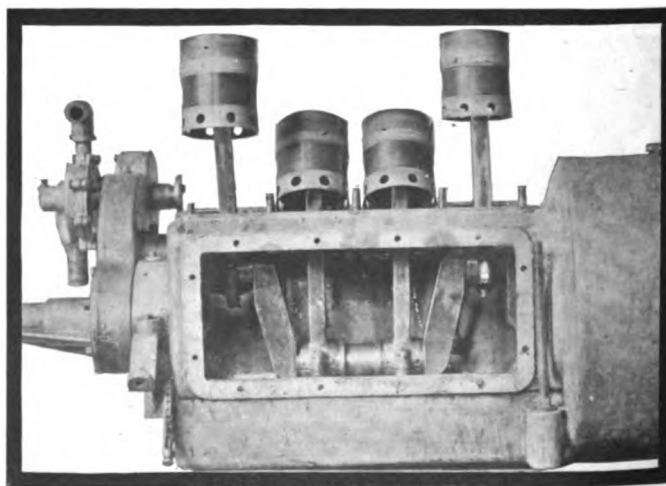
Crankcase of Duesenberg-Mason motor, showing accessibility of four connecting rod bearings when inspection cover plate is removed
